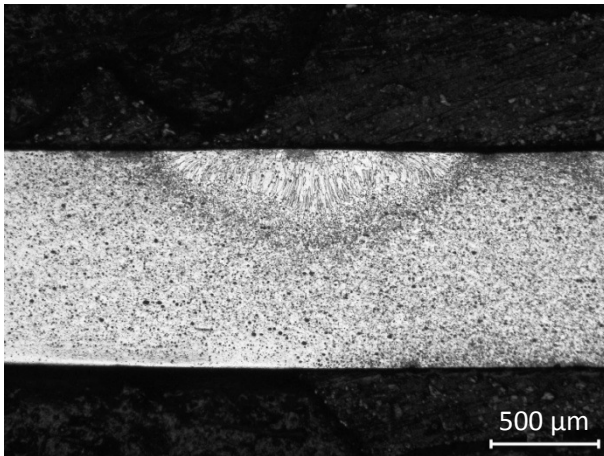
4th series of NiTi pulsed mode beads on plate – macrograph of weld bead #2
